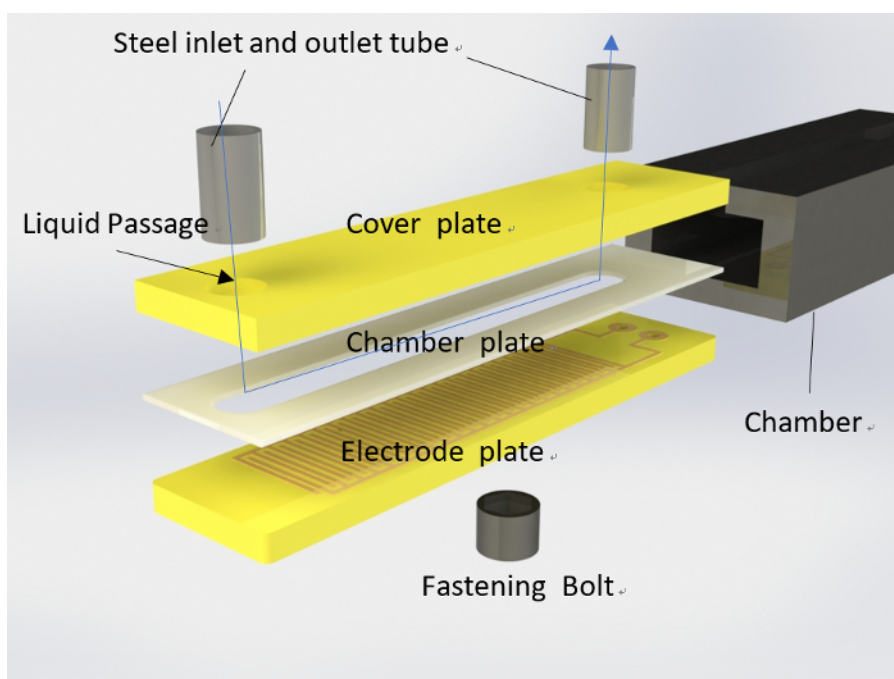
Explosion view of the micropump. From top to bottom are the inlet and outlet tubes, the cover plate, the chamber plate, the electrode plate, and the fastening bolt. The tubes and the cavity on the chamber plate form a liquid passage for the working liquid. [Please click here to view a larger version of this figure.](#)
